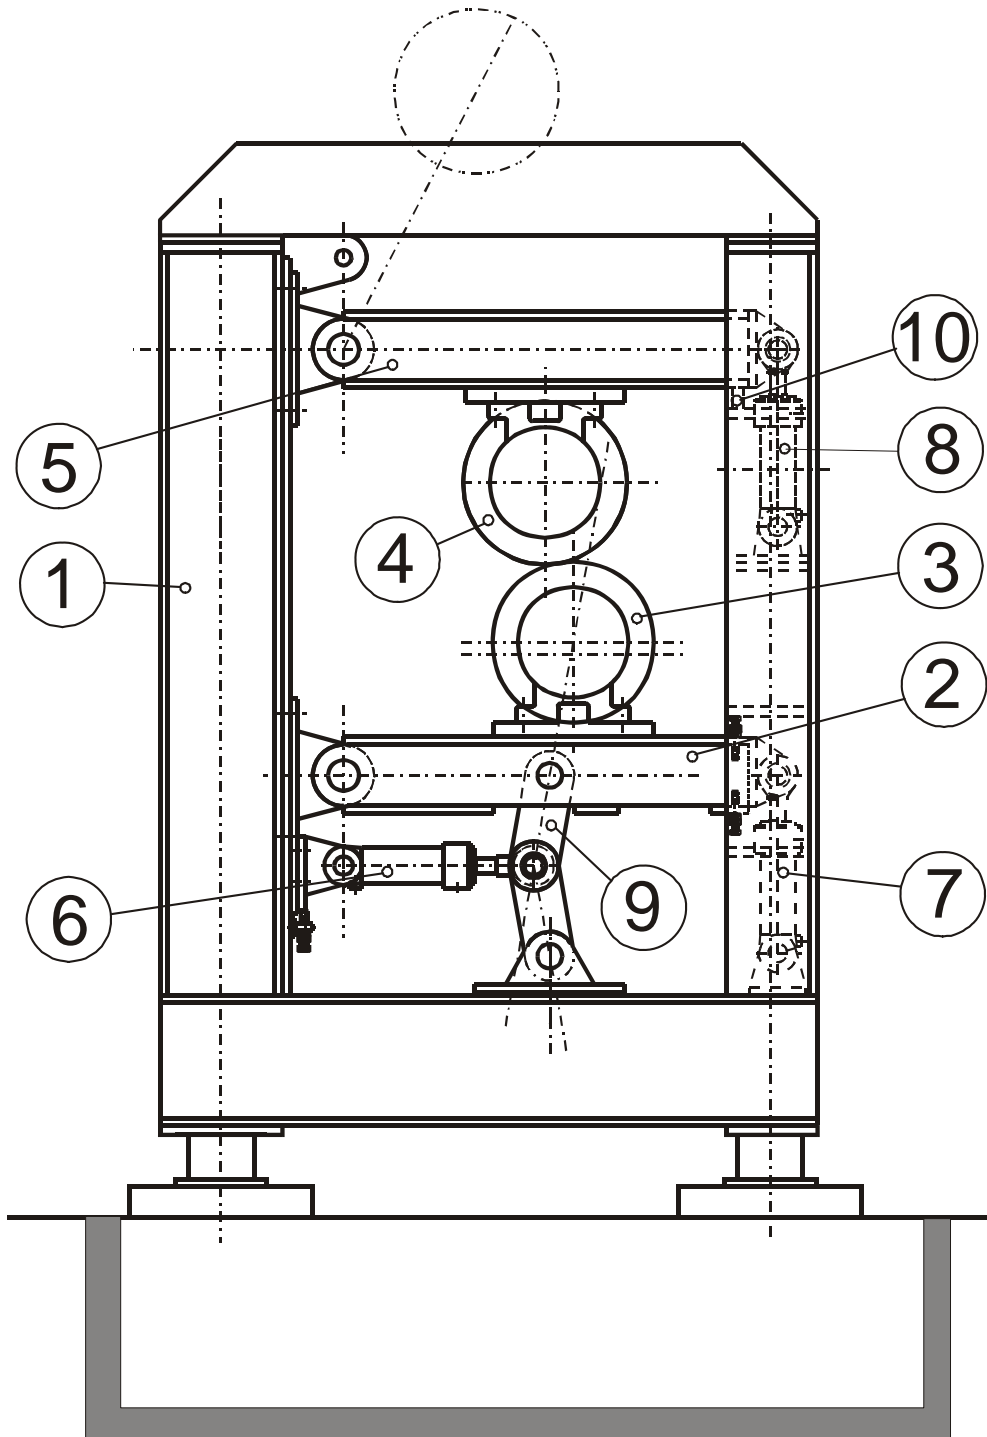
The loading mechanism of the pilot roll press: Frame (1), Lower arm (2), Lower roll (3), Upper roll (4), Upper arm (5), Loading cylinder (6), Excitation/damping cylinder (7), Locking cylinder (8), Loading-toggle-four-bar-linkage (9), Force sensor (10) [Kivinen 2001; Pat. FI 110712 B 2003].
